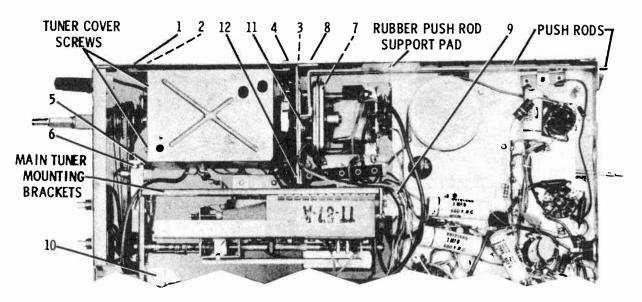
PORTION OF CHASSIS SHOWING TUNER MOUNTING
